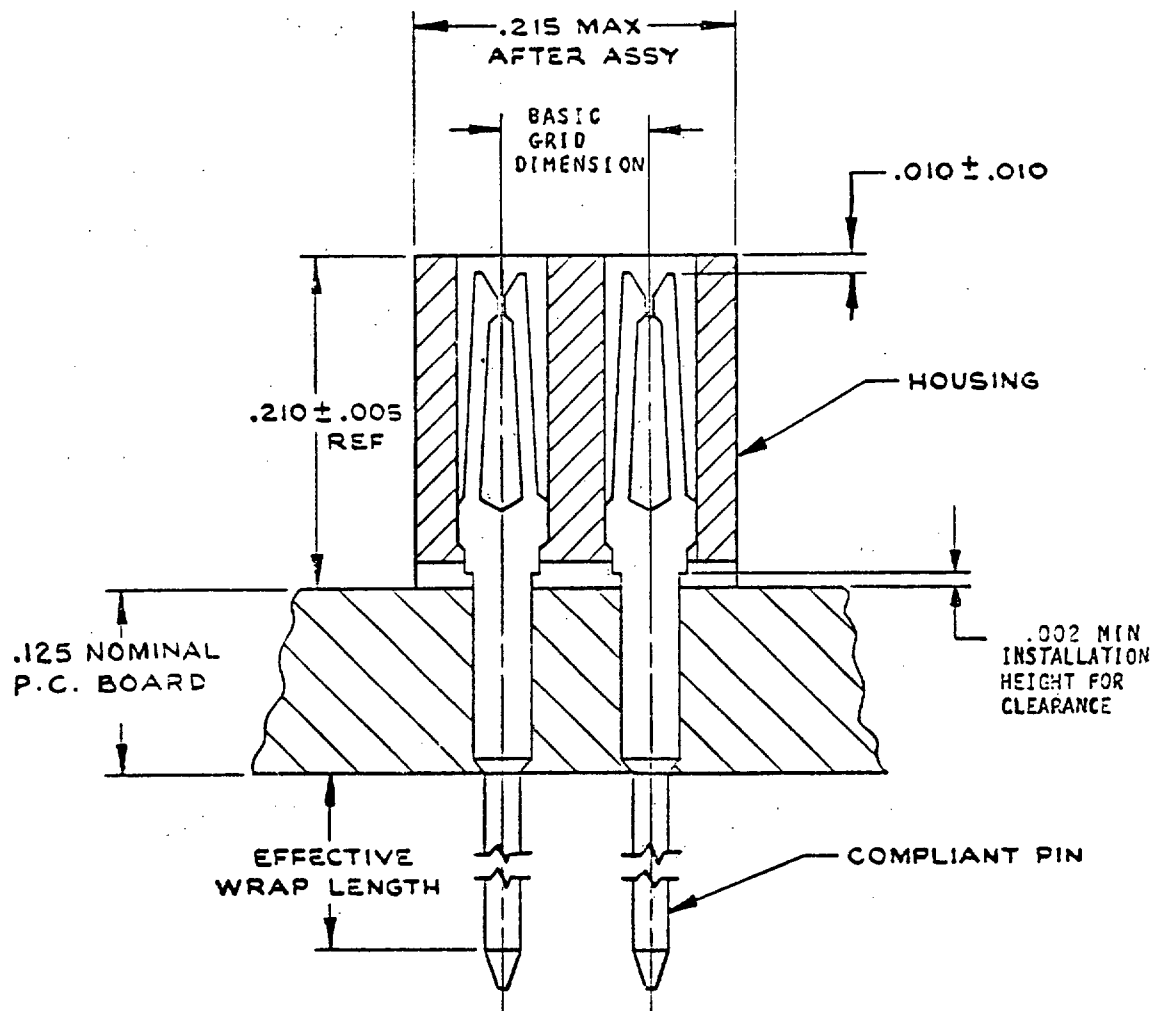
Cross-sectional view of printed-wiring electrical backplane assembly.
